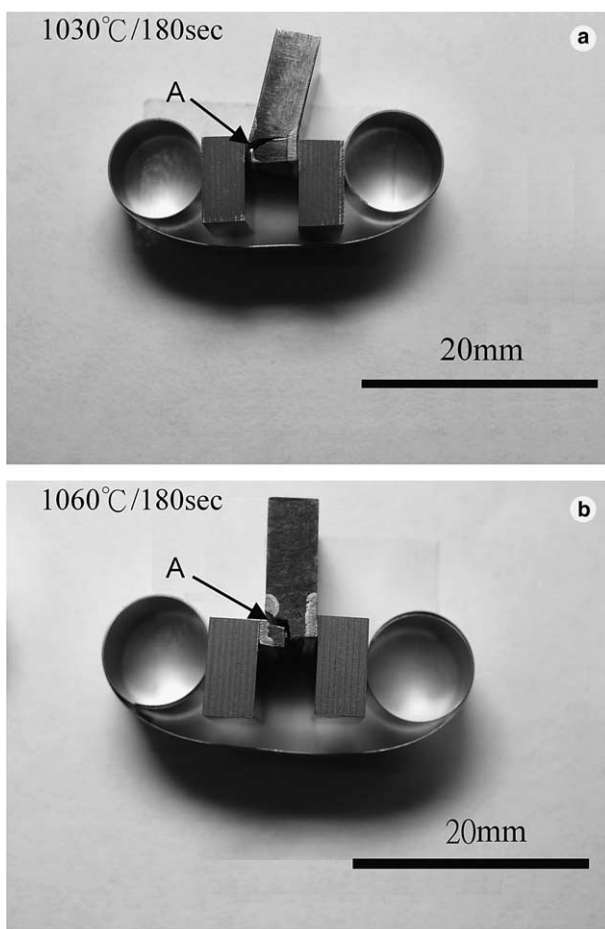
The macroscopic cross section of the brazed joint after shear test: (a) 1030 °C × 180 s and (b) 1060 °C × 180 s.
